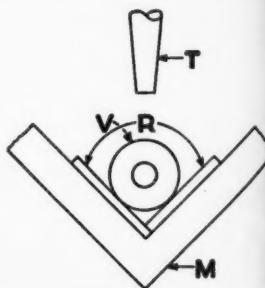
Drawing illustrating method used to heat valve stem. V—valve stem. T—torch. M—muffle of tile. R—welding rod used.
